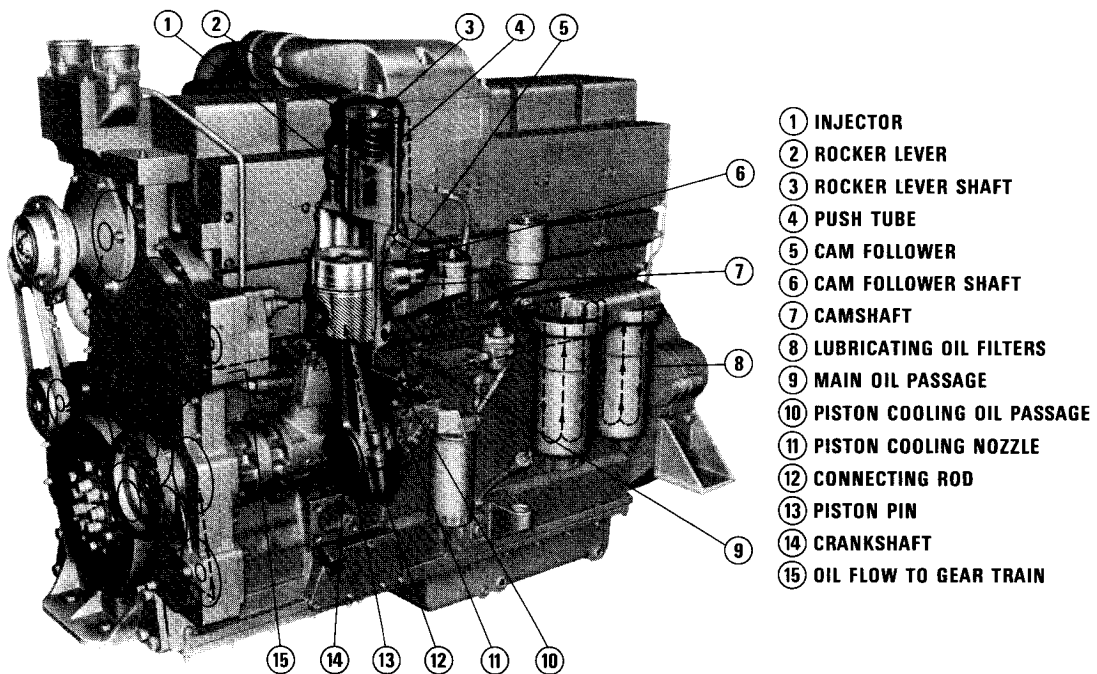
, (LWC-28). Lubricating oil flow — KT(A)-1150 Engine
